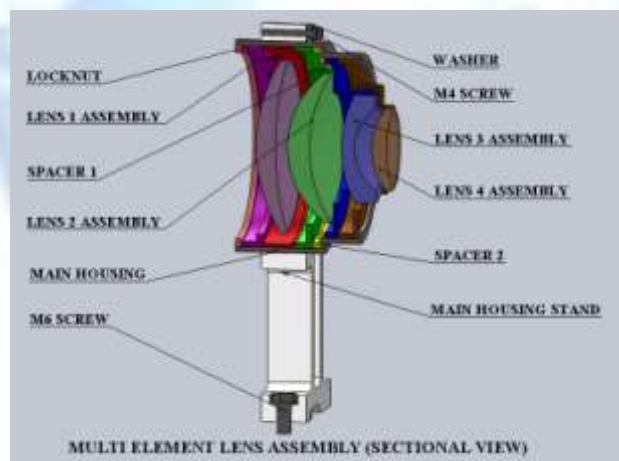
Geometric model of multi element lens assembly (sectional view)
